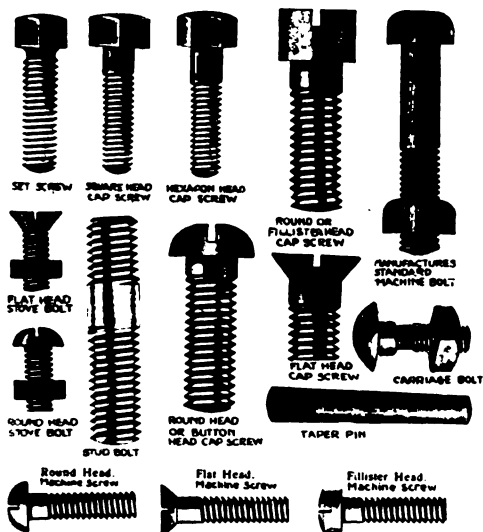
Illustrations showing the different kinds of bolts and screws. The square head cap screw is seldom used. (see chart 247-DD.)
